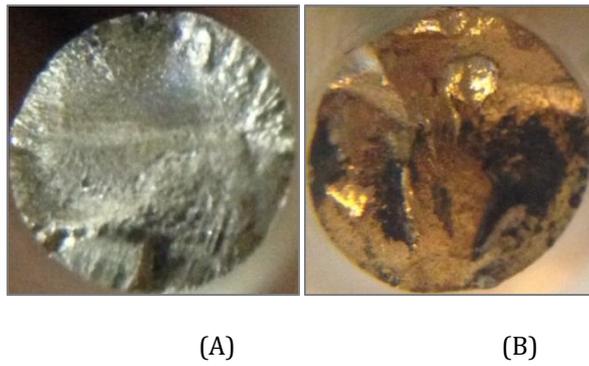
(C26800) brass A-Surface fracture for (Reversed bending) fatigue, B-Surface fracture for (bending with torsion) fatigue
